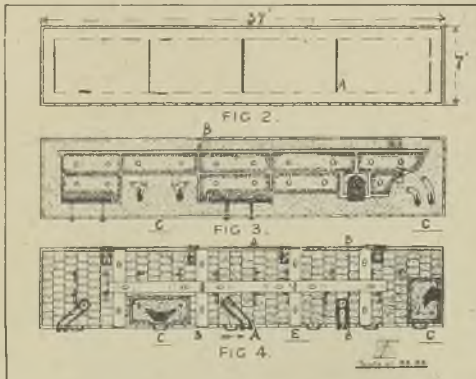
BOTTOM PORTION OF THE MOULDING BOX; FIG. 3.—PLAN OF THE MOULD WITH CORES ARRANGED; FIG. 4.—PLAN OF THE MOULD READY FOR CASTING.
